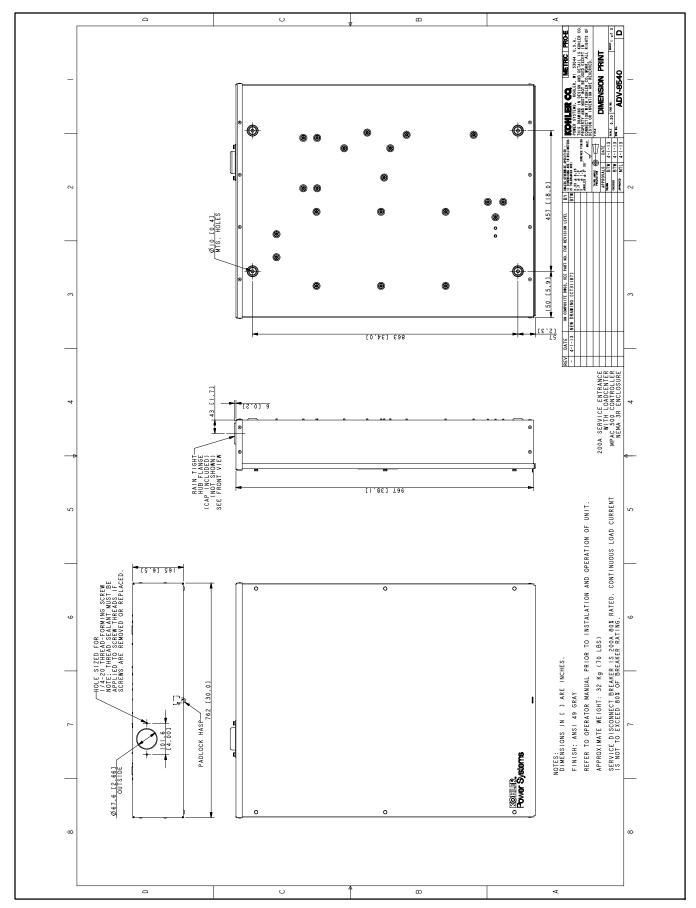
Dimension Drawing, 200 Amp Service Entrance Model with Load Center, ADV-8540, Sheet 1 of 3
